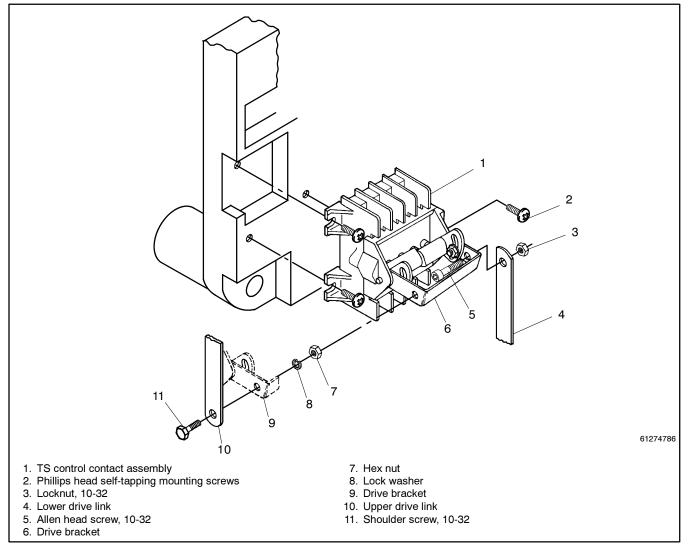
Figure 6. TS Control Contact Assembly Replacement
